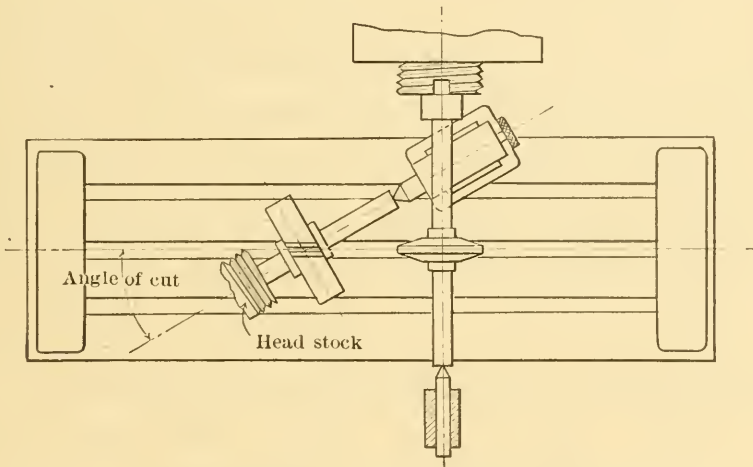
CUTTING STRAIGHT-CUT WORM GEARS ON MILLING MACHINE.
